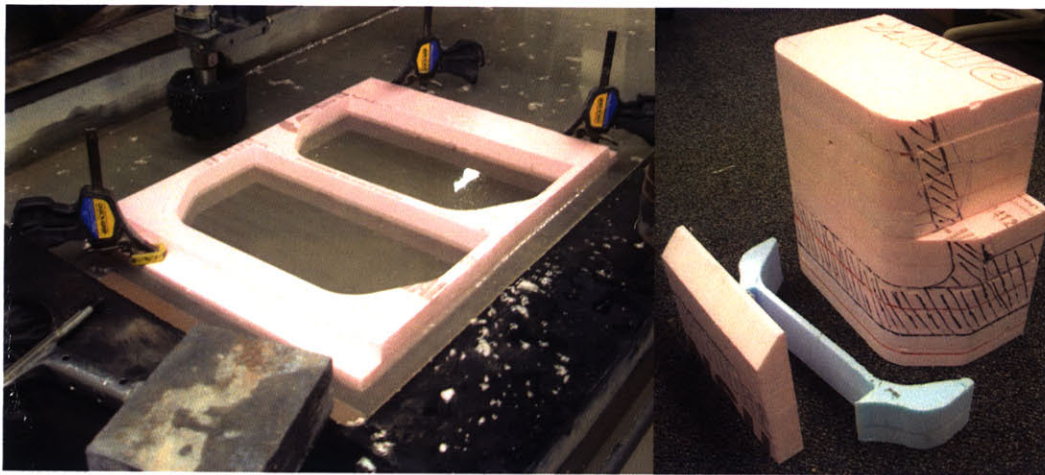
In a), cutting foam using the waterjet and b), the foam sections before being layered.
